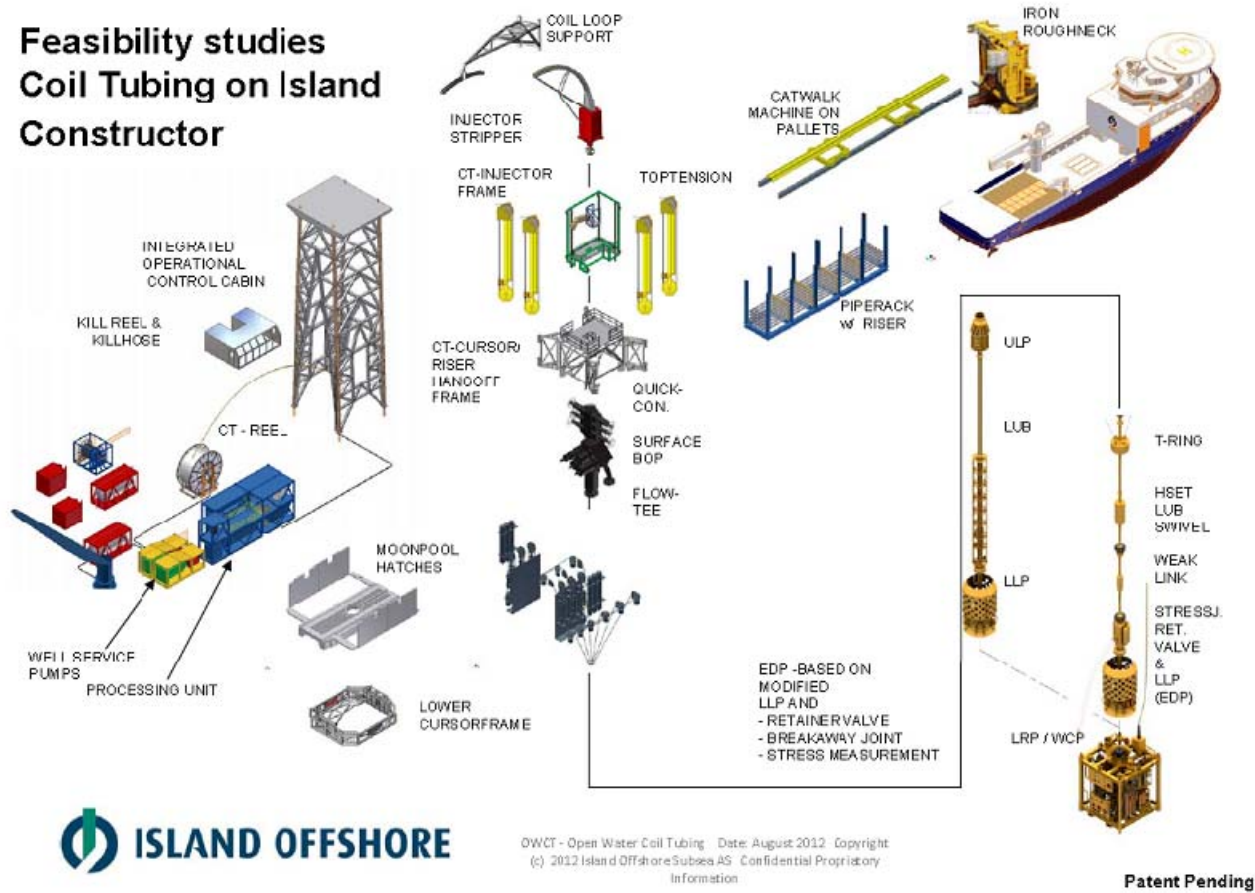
Suggested Coiled Tubing equipment on Island Constructor [27]
